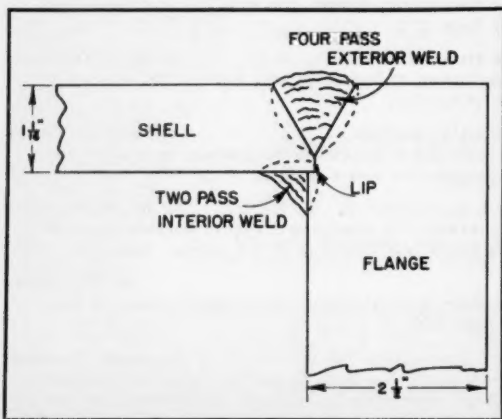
Sketch showing a section through a portion of the shell and flange and indicating where circumferential welds are made. A lip or boss is provided that fits the shell bore next to the internal weld.
